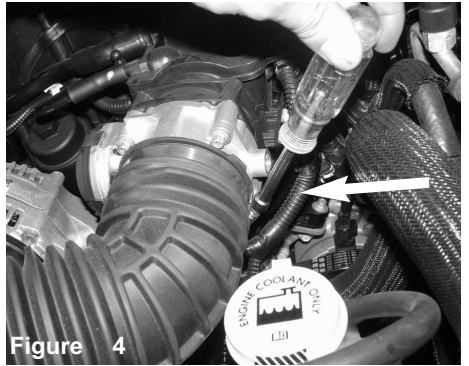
Loosen the clamp on the throttle body using 8mm nut driver.
